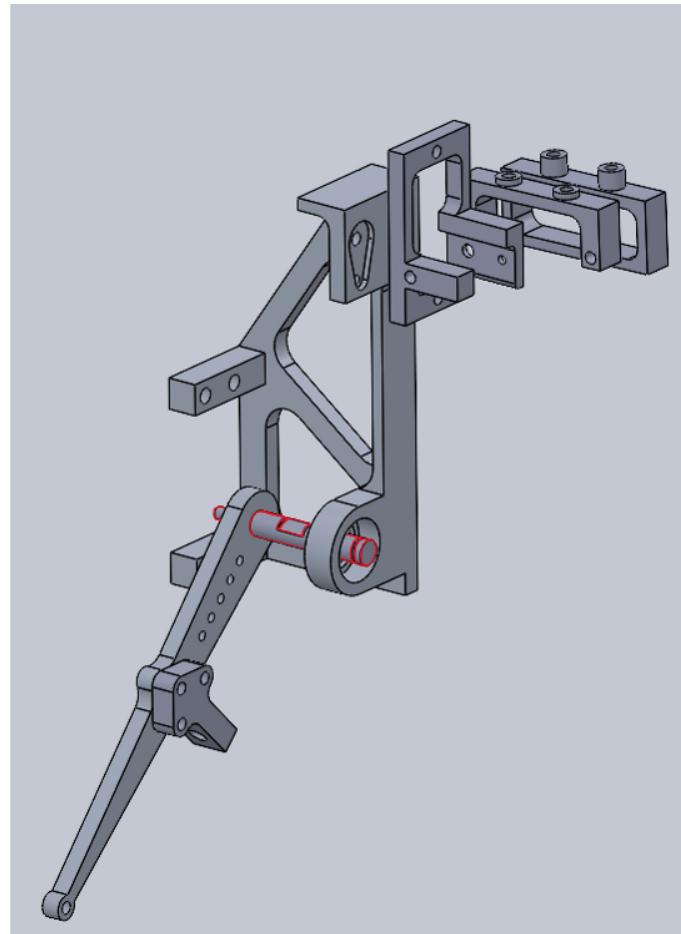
An overview of the CAD model of the leg design, but showing only the components that will be manufactured inhouse. Axe that will be threaded and screwed directly into the motor shaft, and lead directly into a ball bearing, is emphasized in red.
